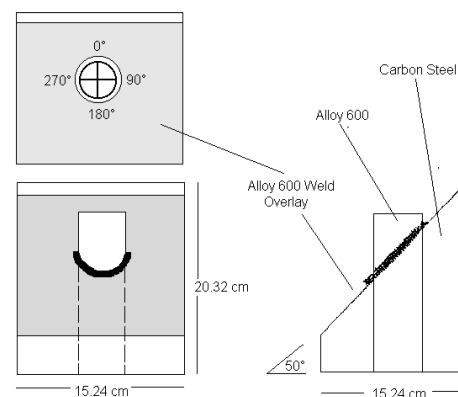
Alloy 600 Heater Sleeve in the Pressurizer Head (50°).
